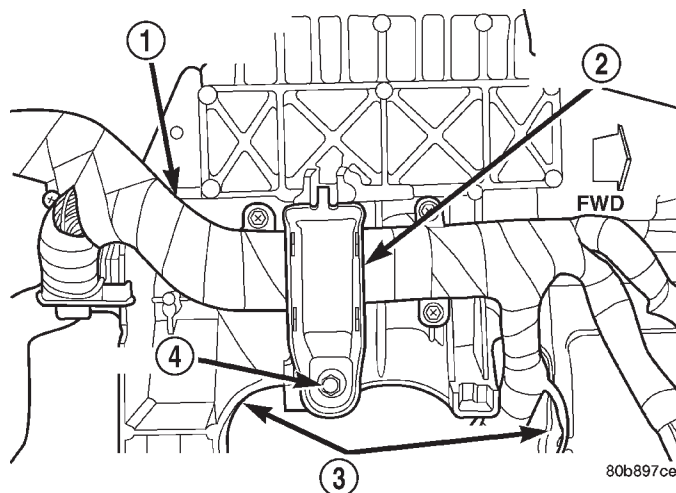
Instrument Panel Plenum Bracket Remove/Install
